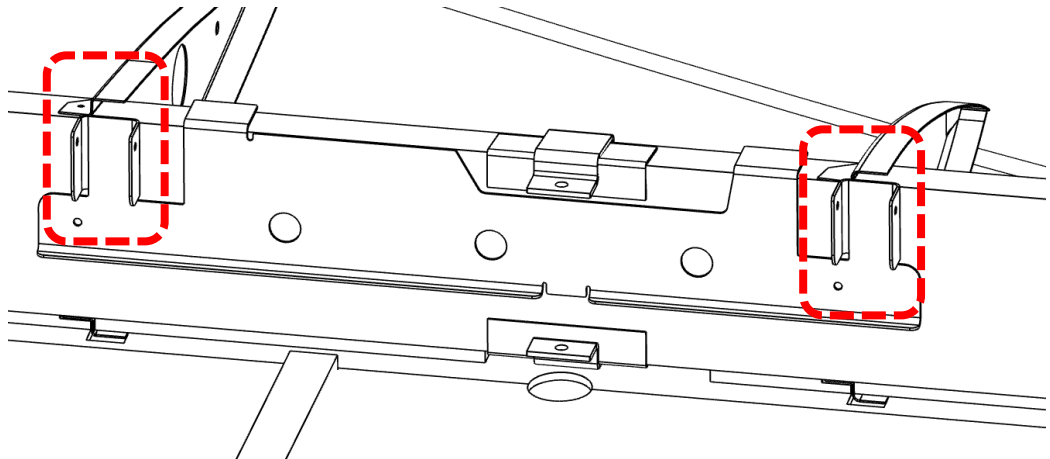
Alignment of Flanges (View of Bracket 30116-150)
